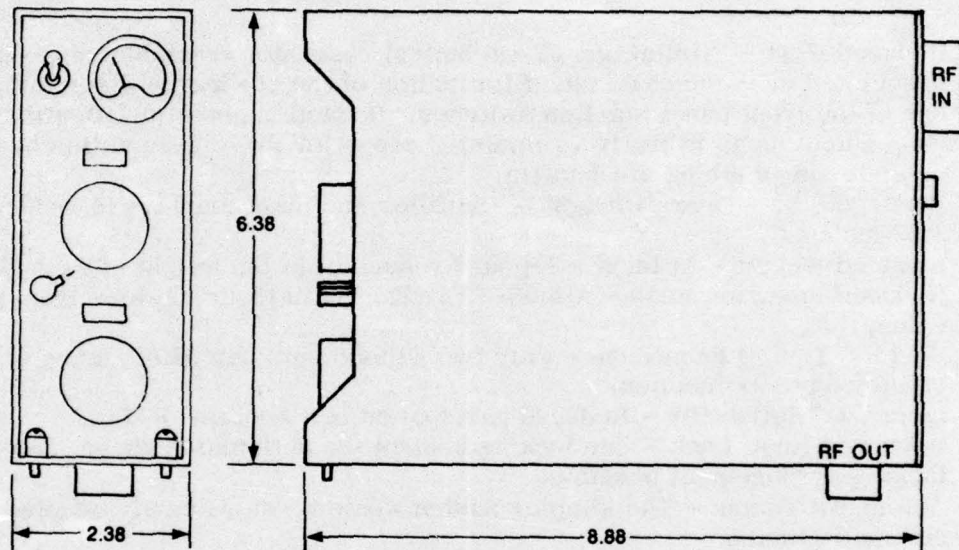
Outline Drawing, 2-Pole Bandpass Filter.
